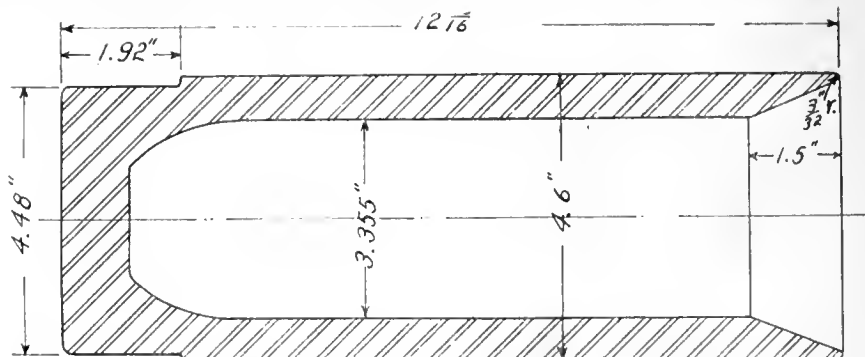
DIMENSIONS OF SHELL FORGING WHEN ROUGH TURNED READY FOR NOSING.
